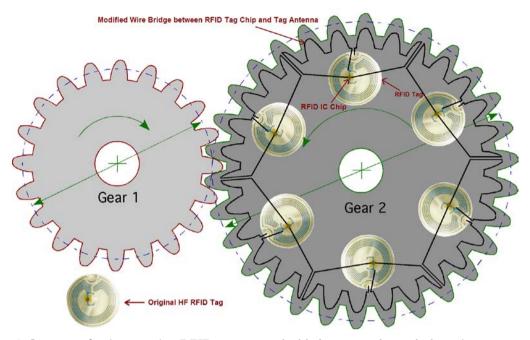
Concept of using passive RFID tags as embedded gear tooth crack detection sensors (tags are not in scale with the meshing gear)
